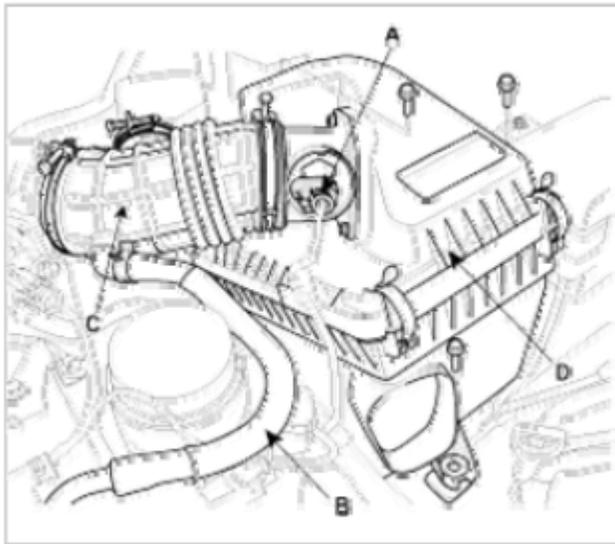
Locating AFS Connector, Breather Hose, Intake Air Hose And Air Cleaner Body
